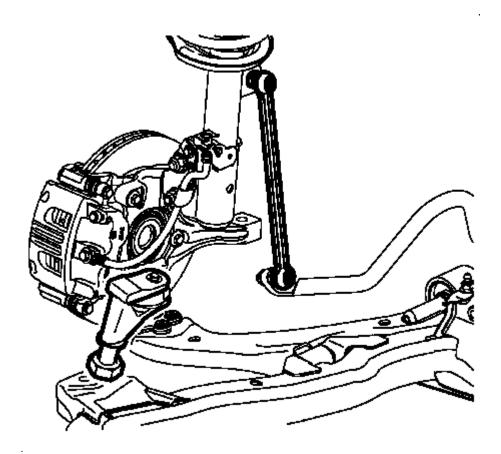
Stabilizer Link To Stabilizer Shaft Nut Courtesy of GENERAL MOTORS COMPANY
